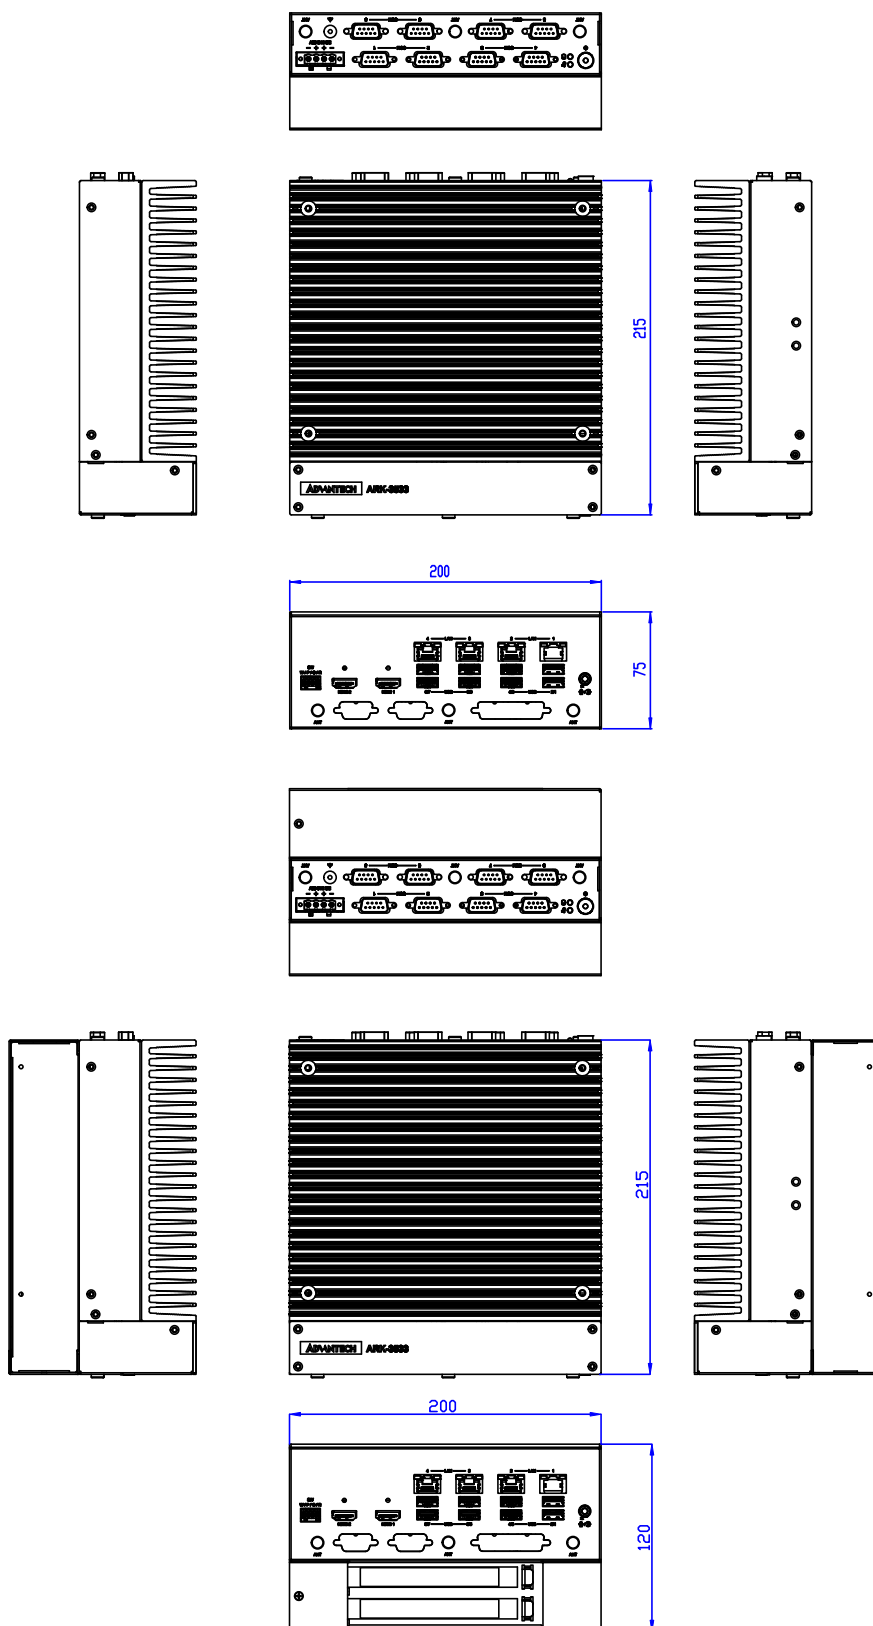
ARK-3533 Mechanical Dimensions Diagram
